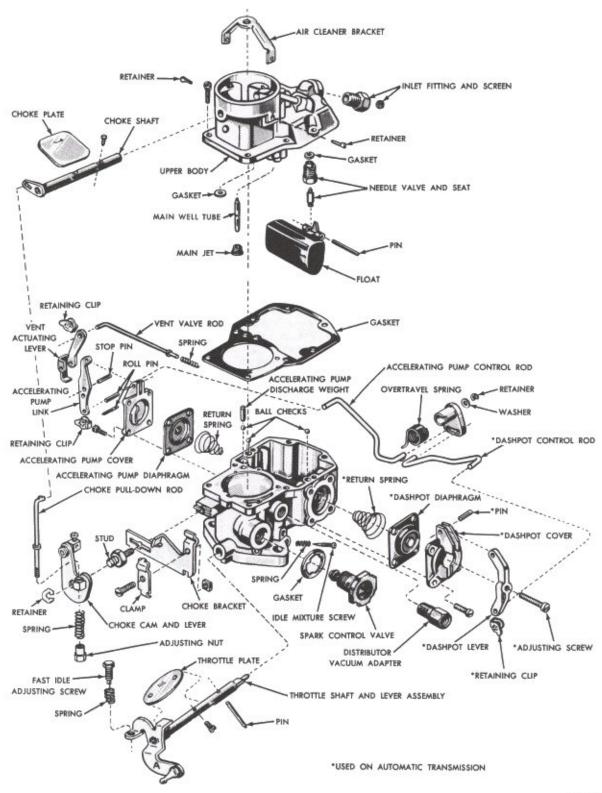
Ford Single-Barrel Carburetor—Manual Choke—Disassembled
